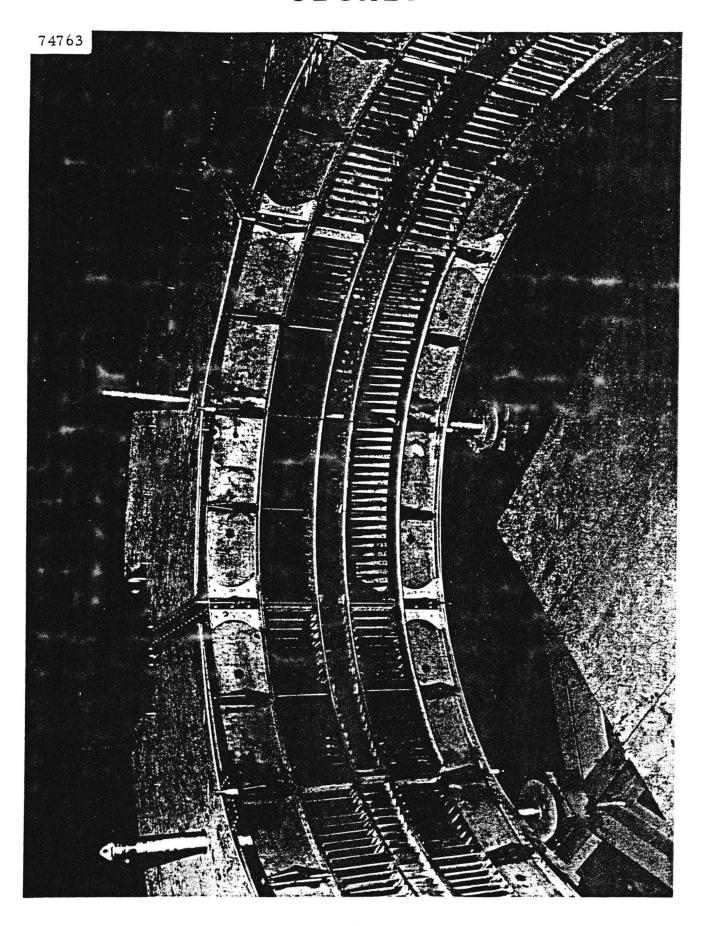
CENTRE OF AIRFRAME SHOWING STATOR BLADES FOR TURBINE AND COMPRESSOR
